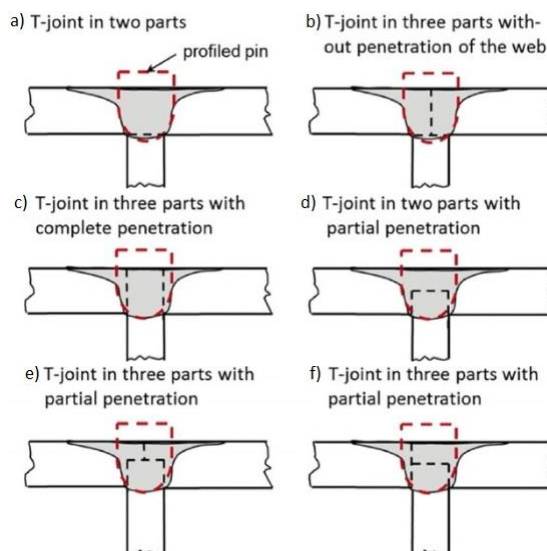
Design solutions to produce T-joints by FSW, /5/.
